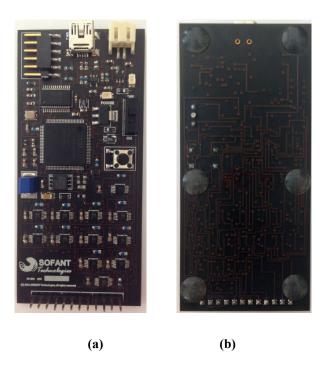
Fabricated PCB Design Using Microcontroller LPC1768 (a) Top View (b) Bottom View
